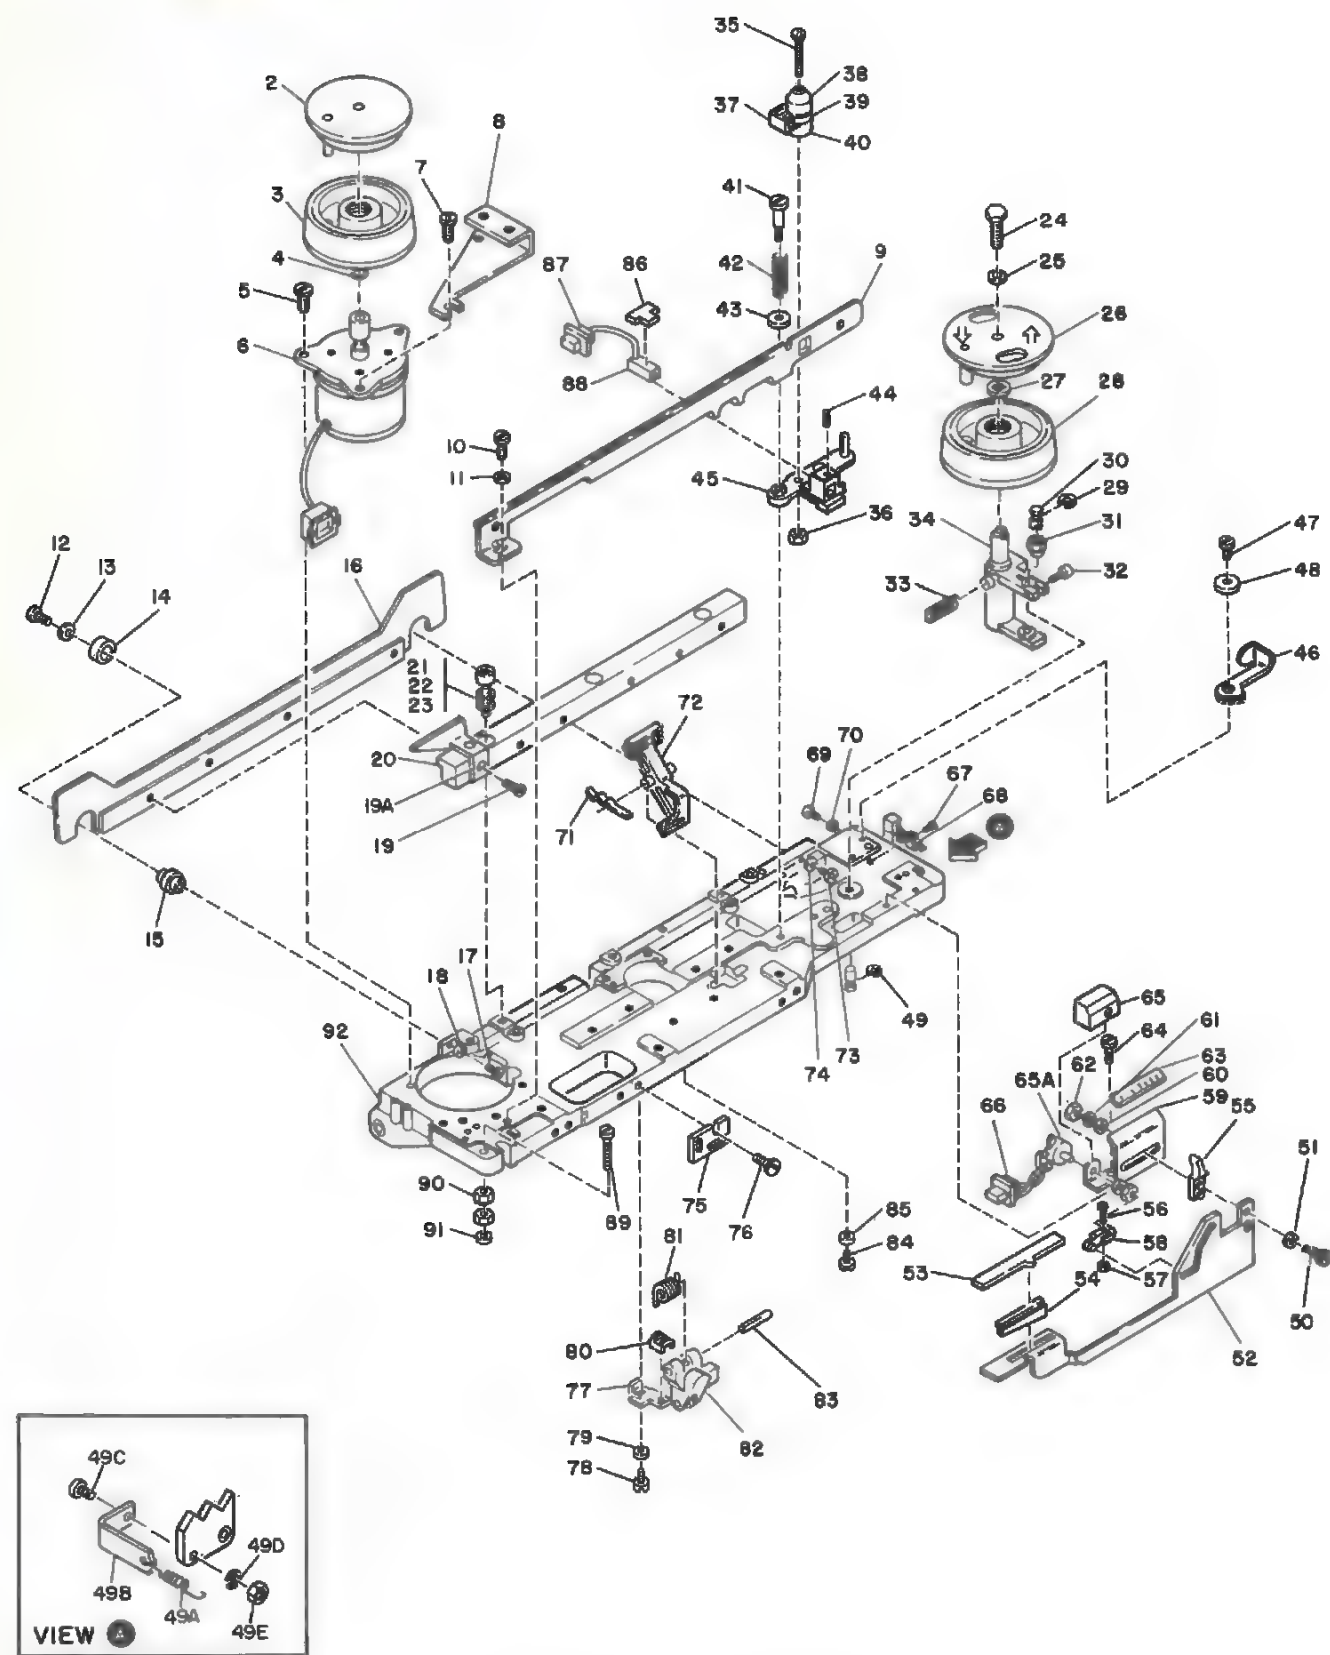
FRONT ASSEMBLY. SEE LIST 5.
